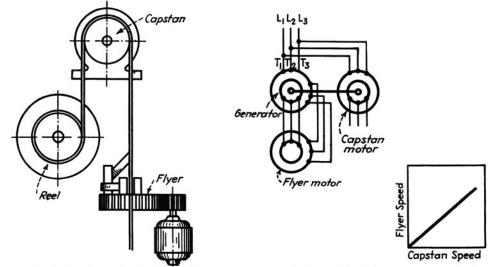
A wire-insulating machine requires a constant speed ratio between capstan motor and flyer for starting and running. The capstan motor drives a frequency changer or transmitter electrically connected to the synchronous motor of the flyer. The speed ratio between flyer and capstan is constant at all times.
